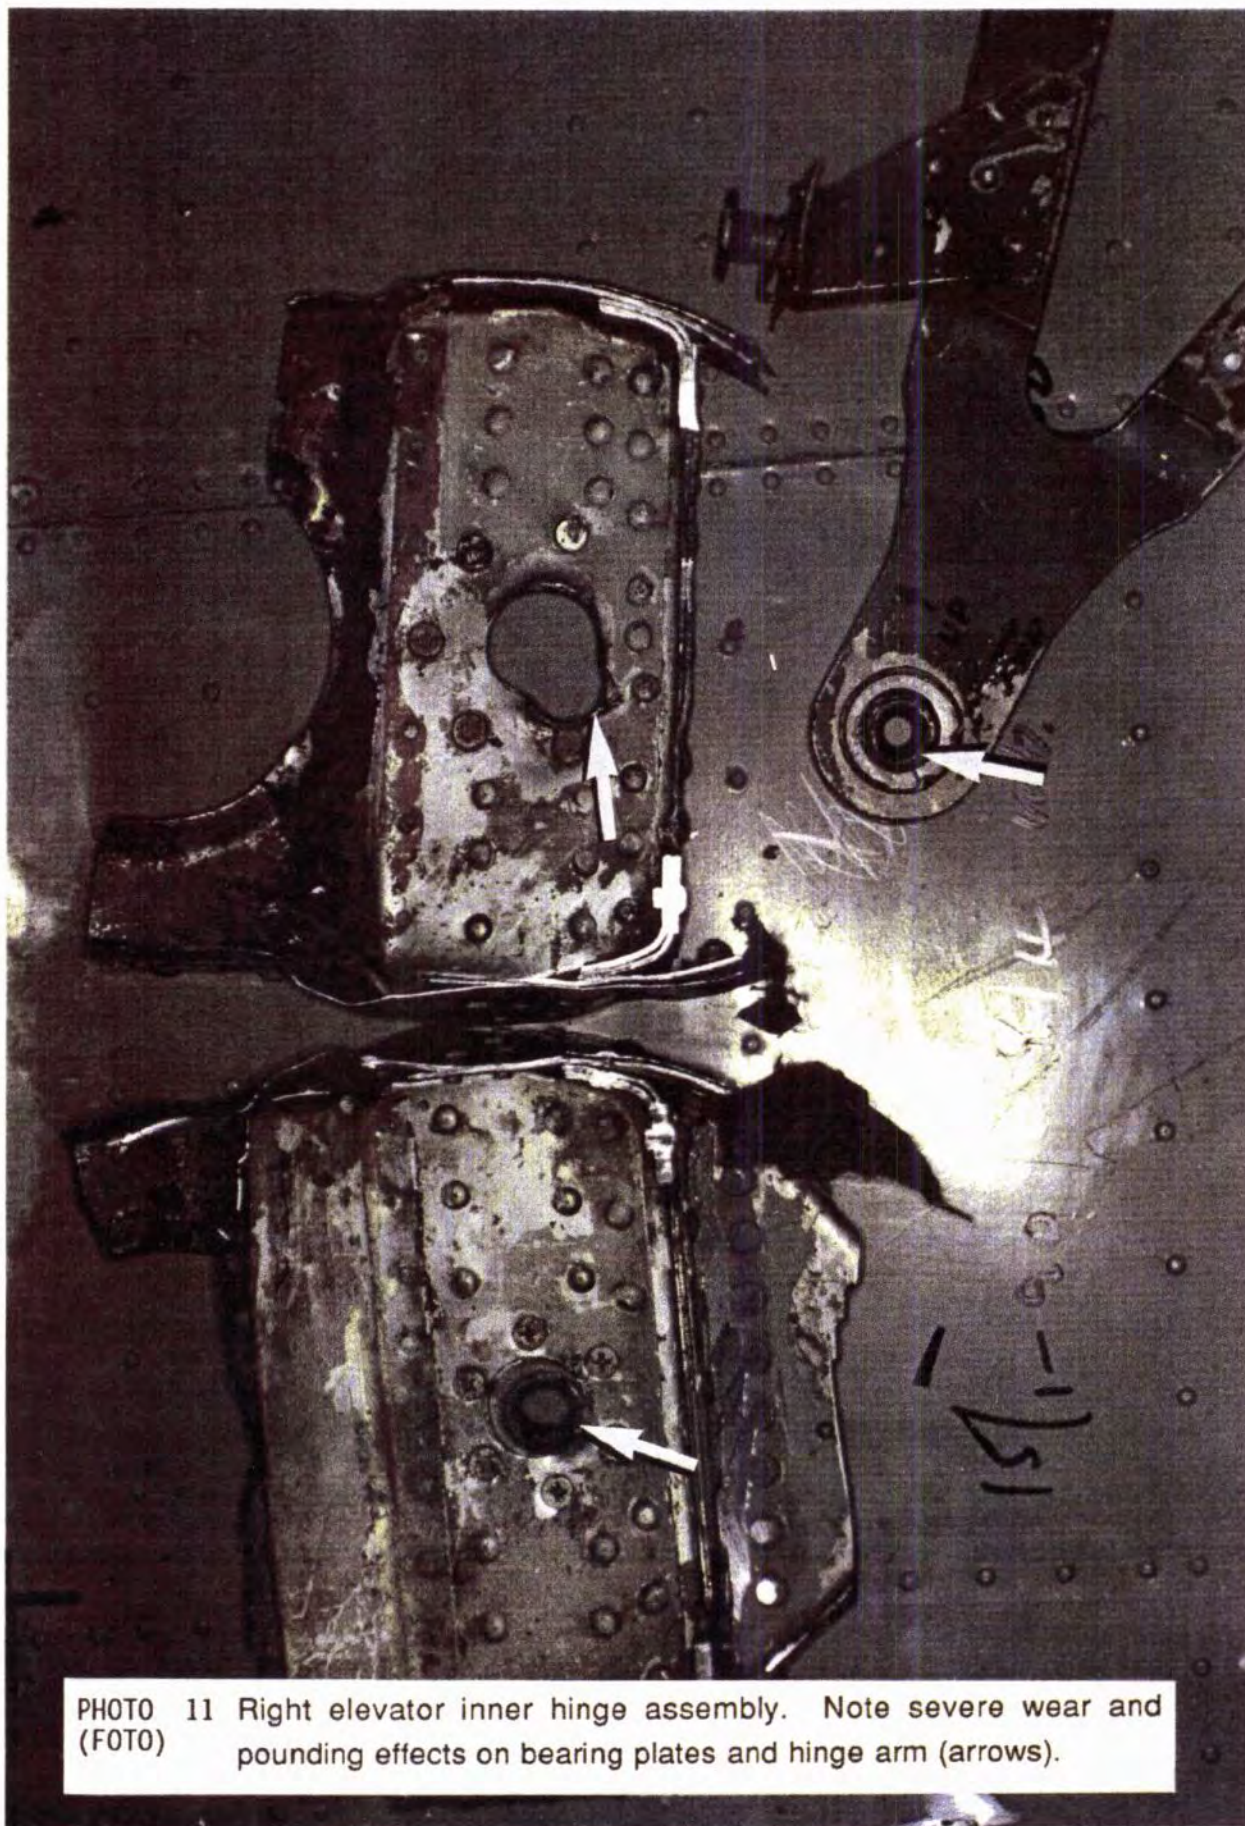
Right elevator inner hinge assembly. Note severe wear and (FOTO) pounding effects on bearing plates and hinge arm (arrows).
